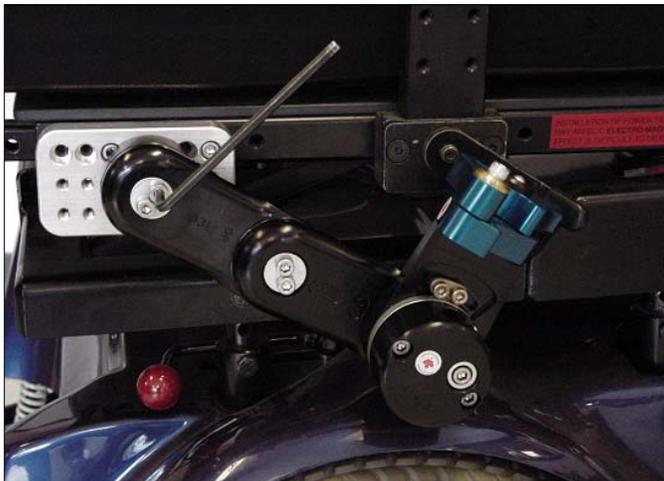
Install the Frame Clamp Assembly on the Inner Piece. The Swivel Clamps should be gently tightened to hold the components in place, however they may need to be loosened during the Final Adjustment.
